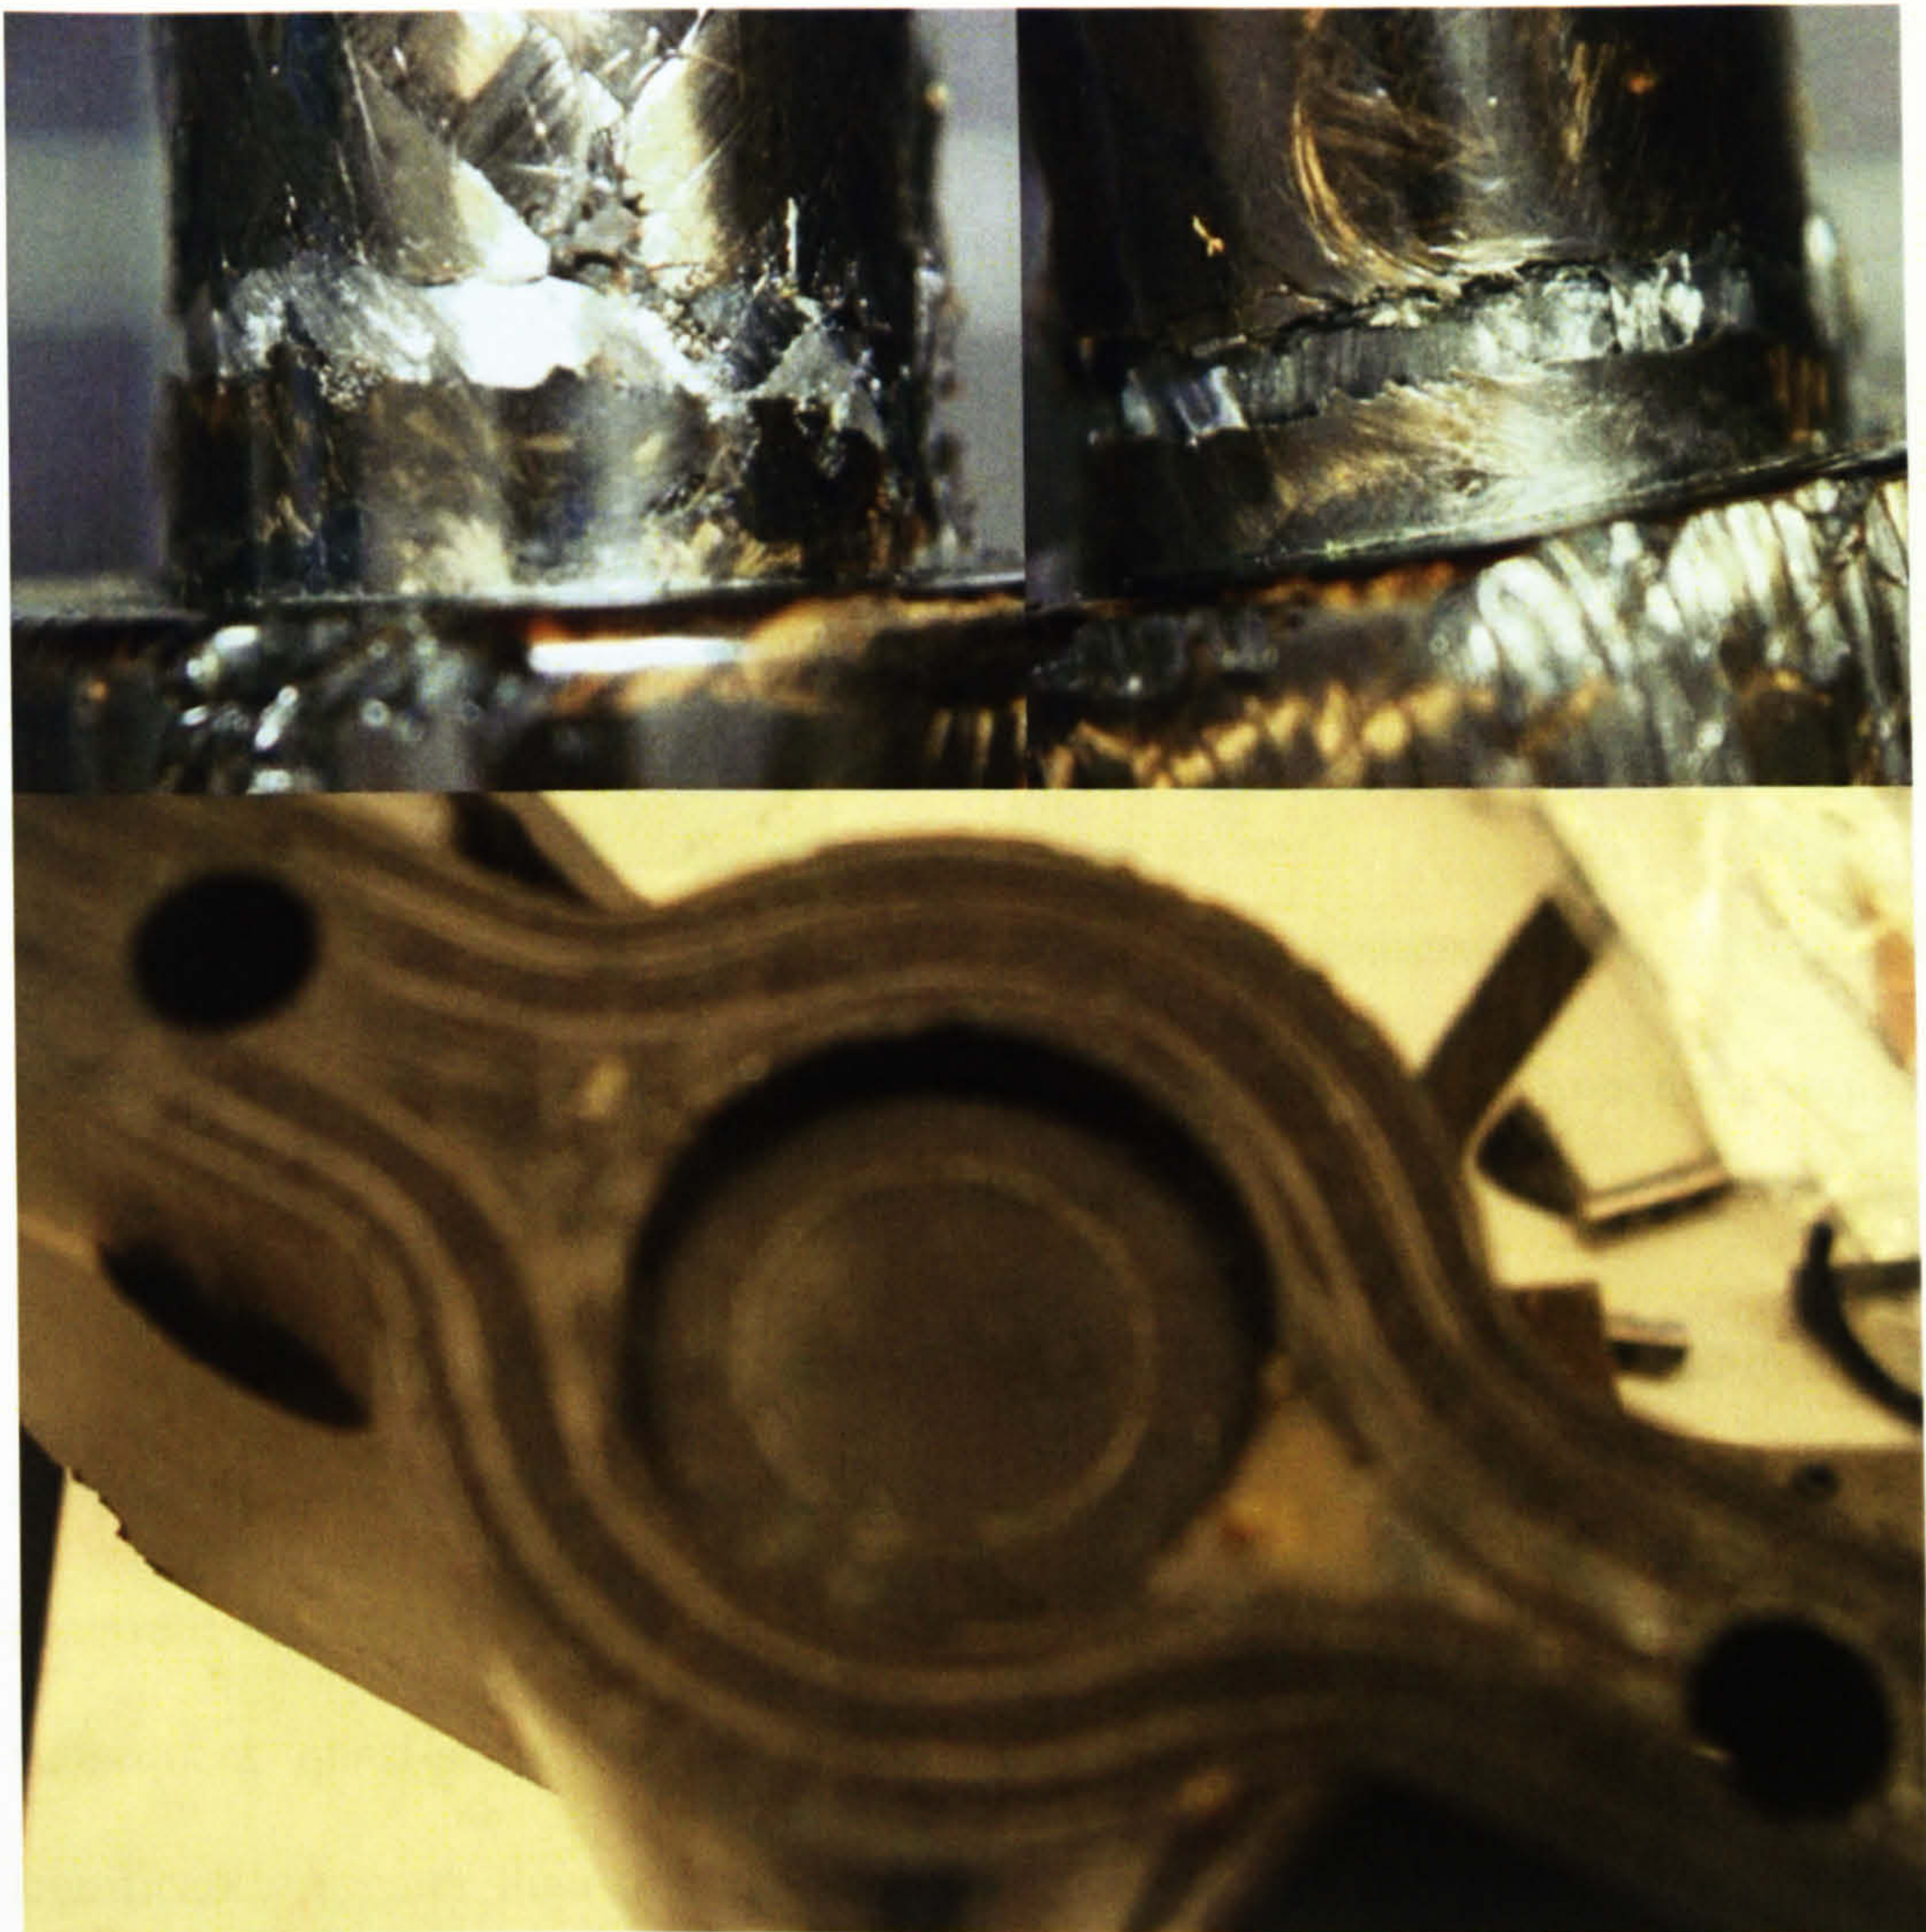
Fracture surfaces of first uni-axial test specimen after residual strength test
